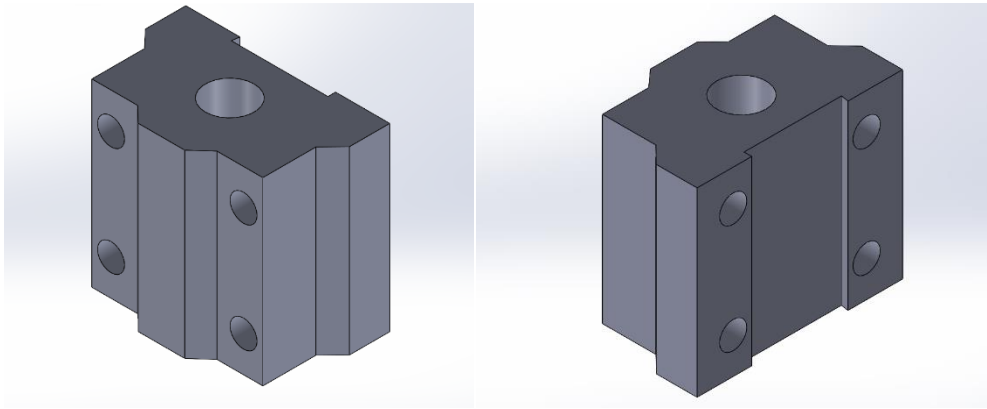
Our model of the ball bearing slide for the linear guide rod.
